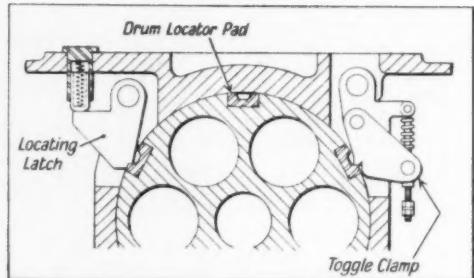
Diagram Showing the Spindle Drum Locating and Clamping Mechanism on a Wickman Automatic
